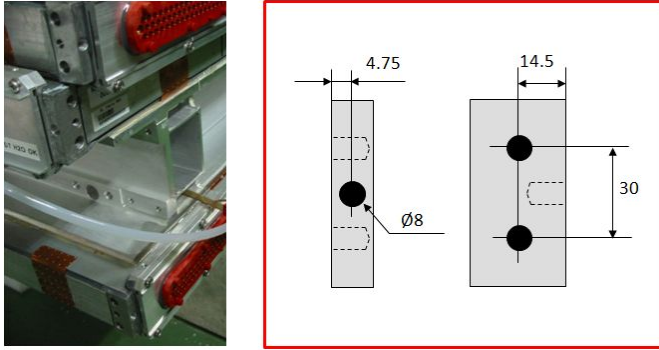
Corner blocks on the DT chambers. Left: the photo; right: the technical drawing.
